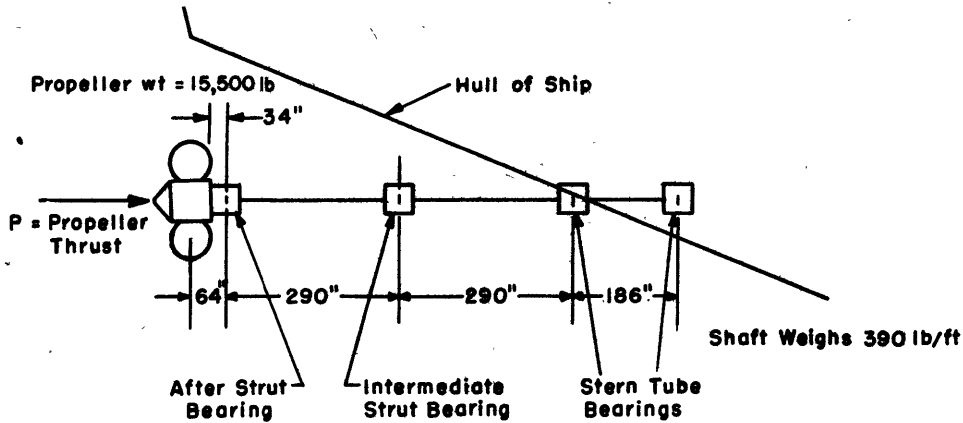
Schematic Arrangement of Propeller and Propeller Shaft
